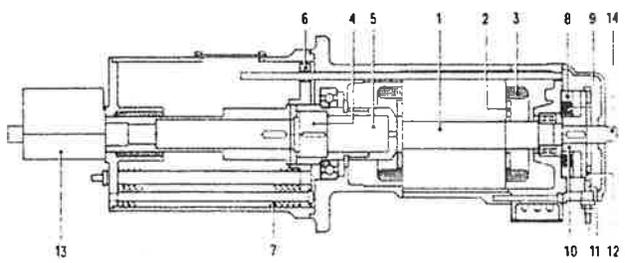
SCHEMATIC VIEW OF INTEGRATED DC DRIVE UNIT WITH DOUBLE REDUCTION GEAR.
